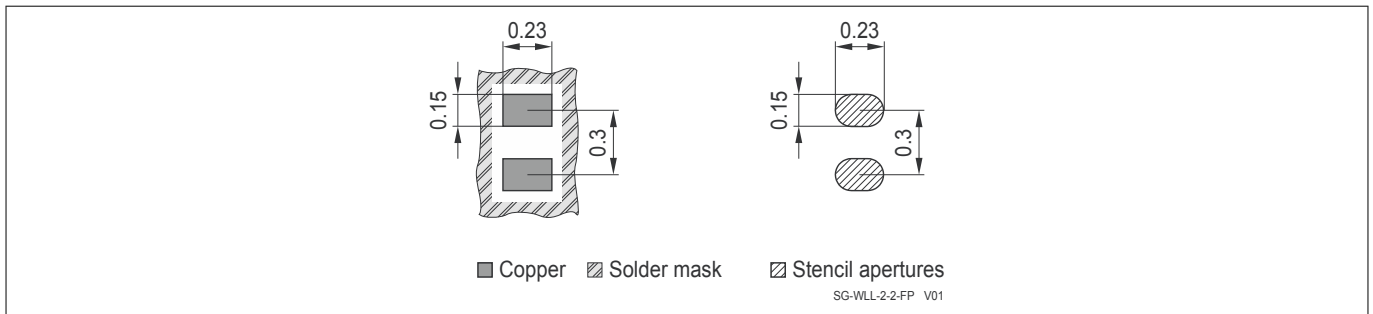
WLL-2-2 footprint (dimension in mm), recommendation for Printed Circuit Board assembly see [2]
